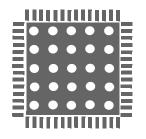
is a plot of the solder mask pattern and Figure 43 displays an X-Ray image of the assembly (darker areas indicate solder).
